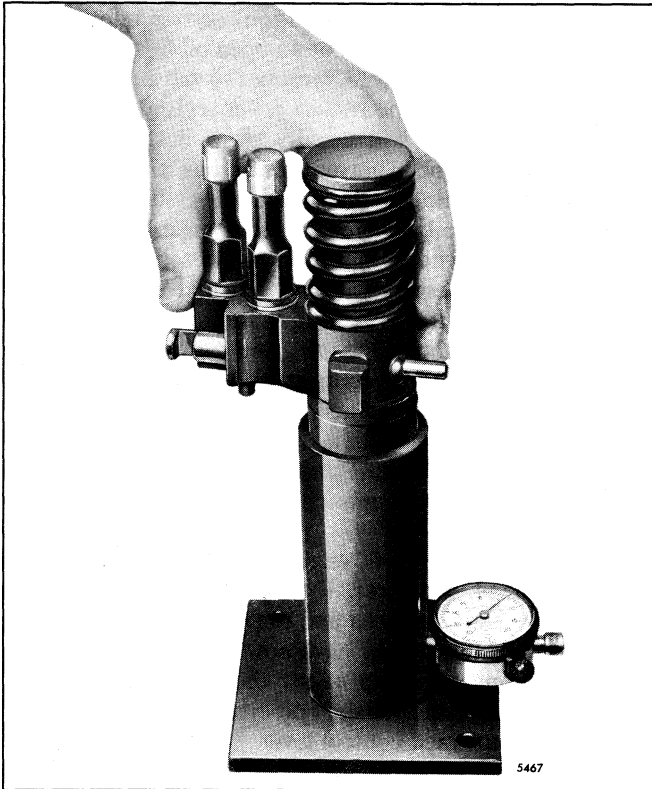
Checking Injector Spray Tip Concentricity using Tool J 23905
